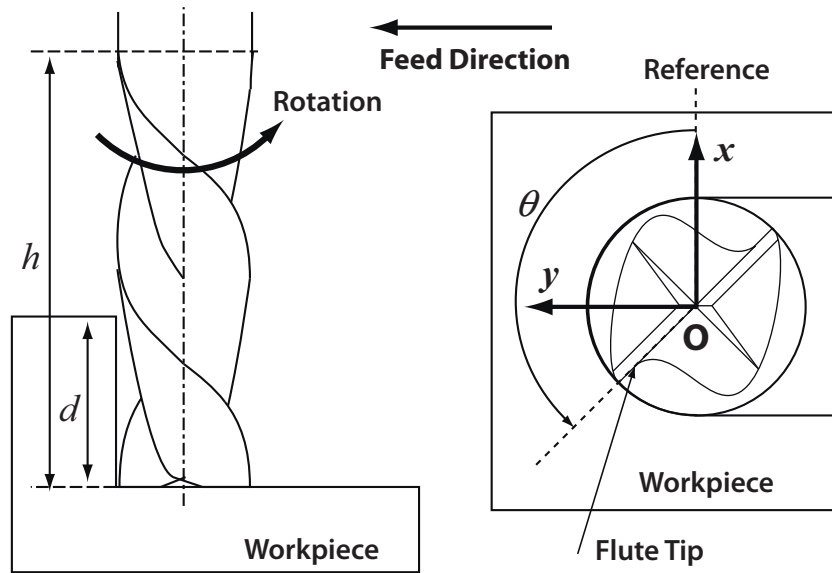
Geometry of a two-flute end-milling cutter and workpiece in full immersion.
